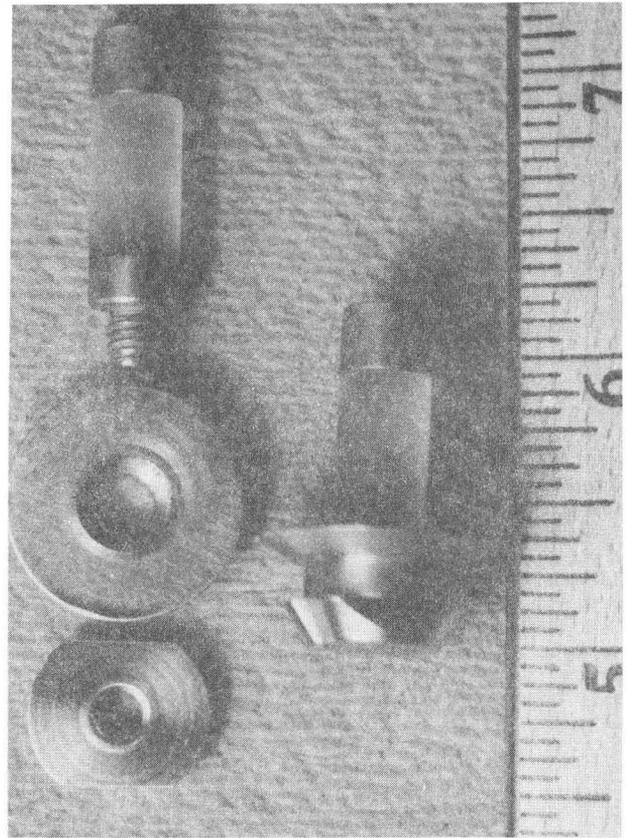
A photograph similar to figure 2, except of the new end insulators (compression) for E2. Two insulators are shown, one disassembled to show the separate pieces.
